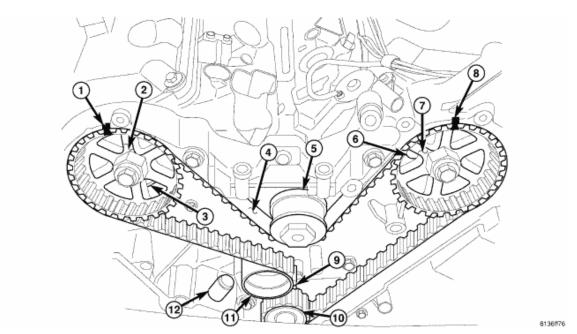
Identifying Timing Gear Components Courtesy of CHRYSLER LLC
